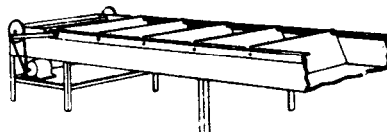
RECIPROCATING FLIGHT CONVEYOR
